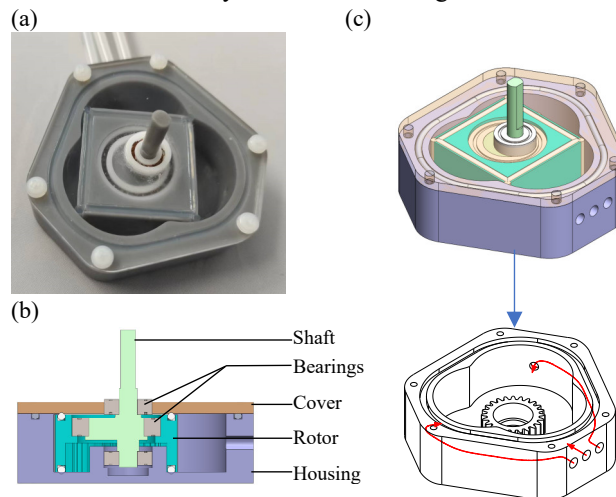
(a) Photo of the stepper motor. (b) Section view of the motor. (c) 3D view of the motor and the airflow channels inside the housing.
